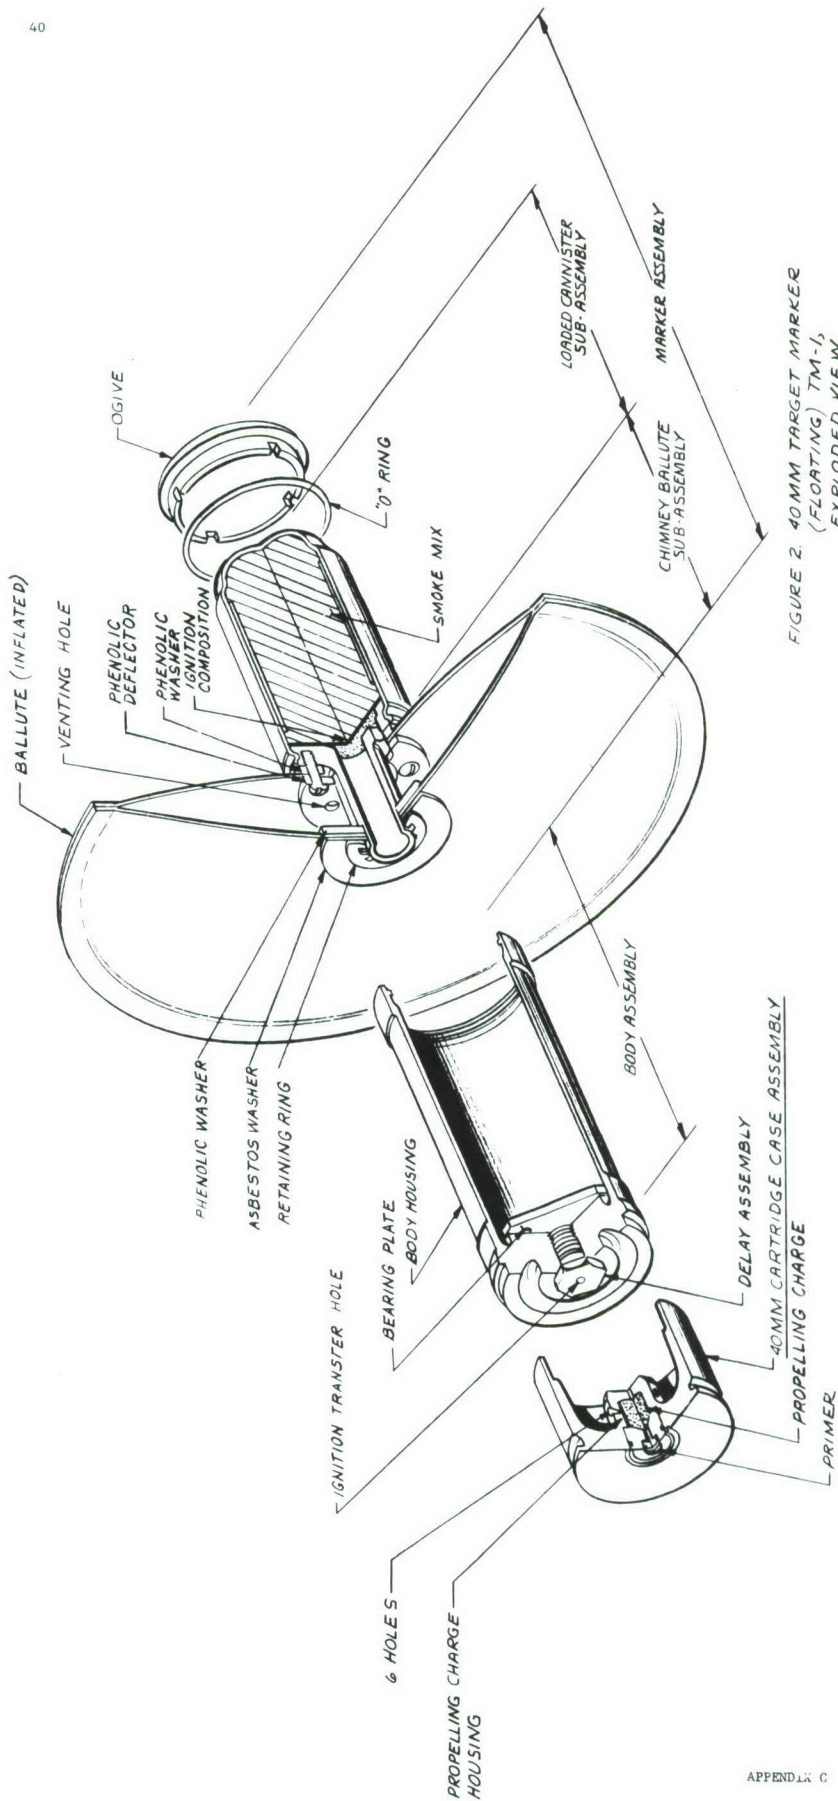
40MM TARGET MARKER (FLOATING) TM-1, EXPLODED VIEW
